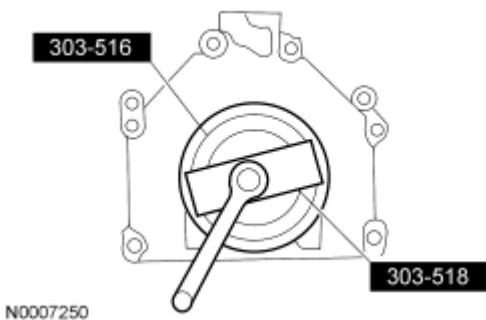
Using Special Tools To Install New Crankshaft Rear Seal
